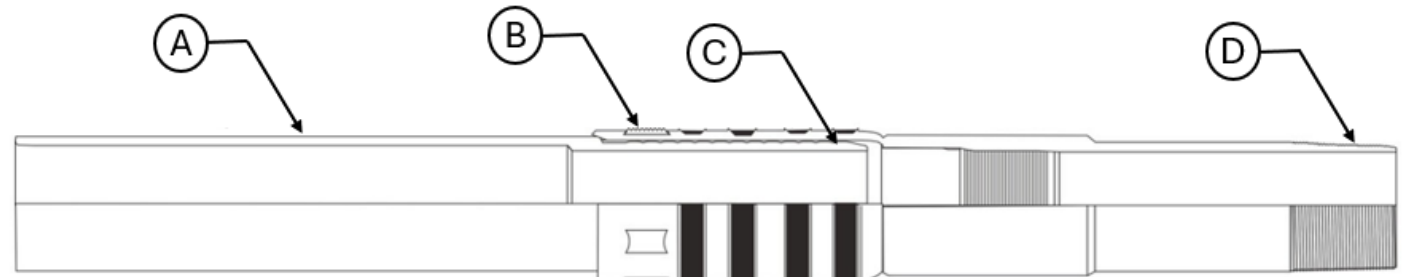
Mechanical Set Liner Hanger Packer System, Activated by Hydraulic Running Tool
